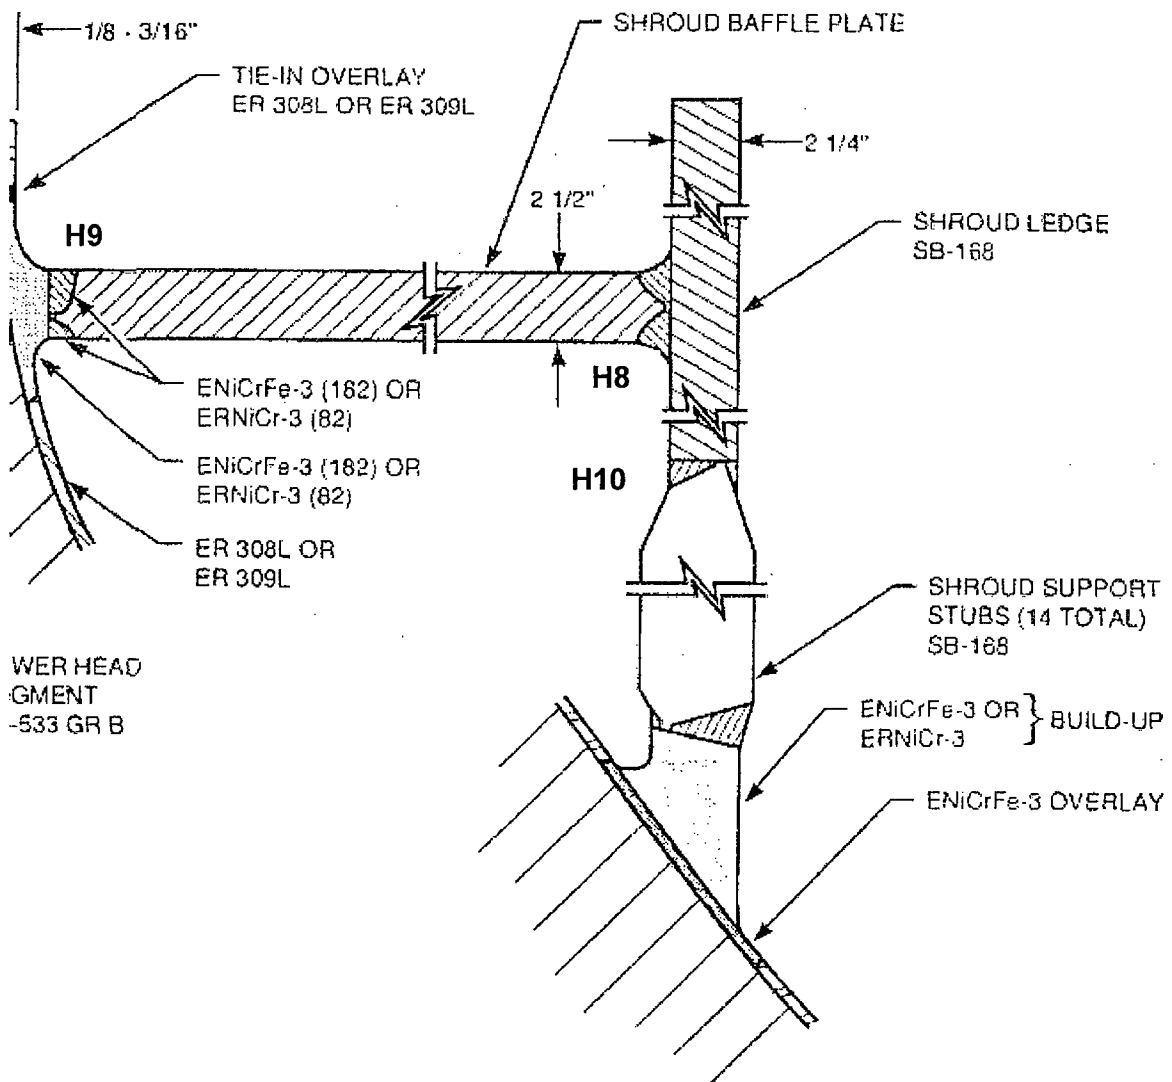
CBIN/CB&I Vessel Shroud Support Structure Attachment Configuration [2]
